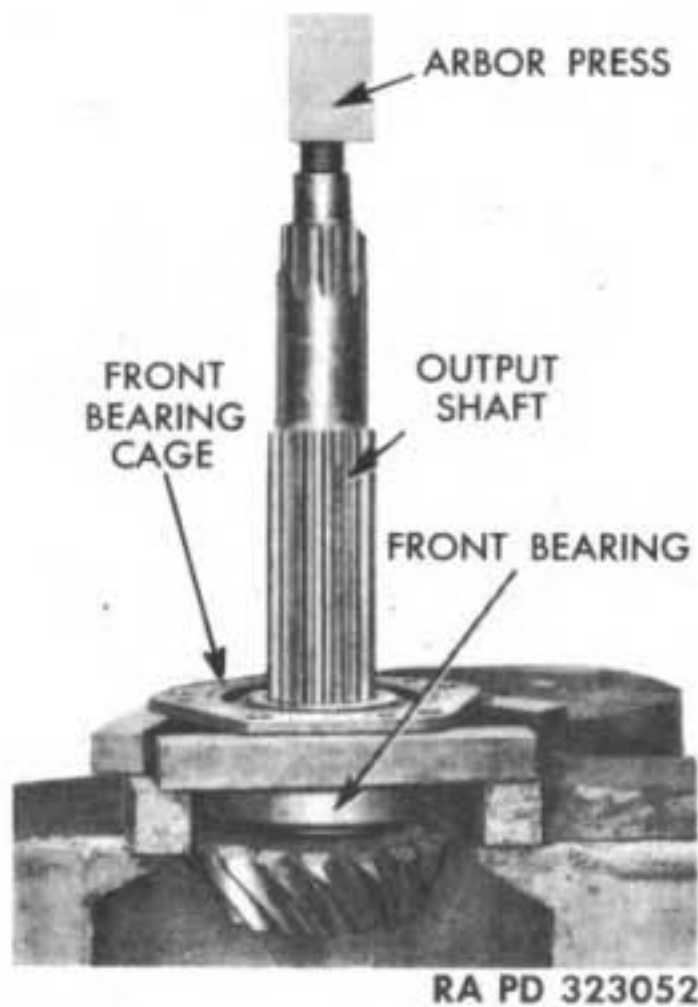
Pulling Transmission Output Shaft Front Bearing Cage
